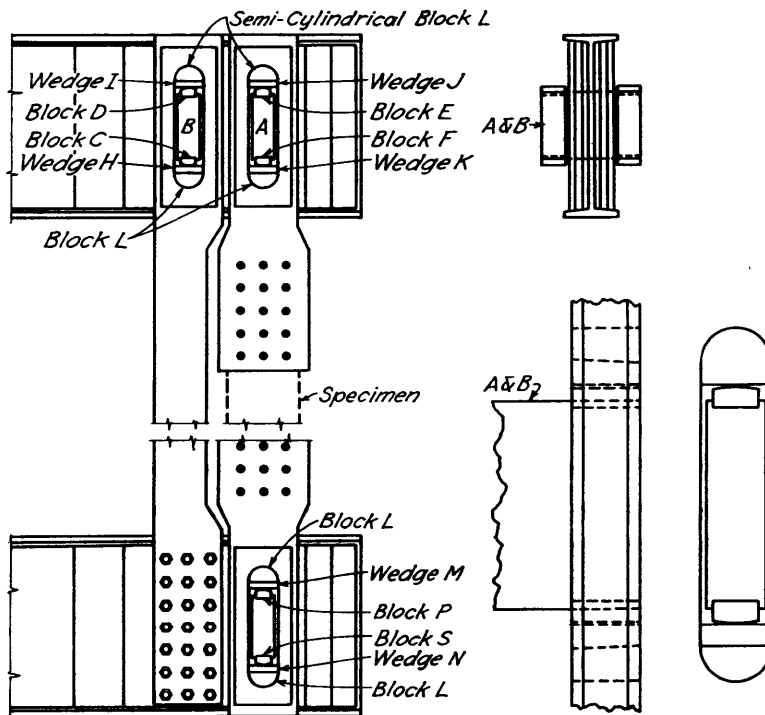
Bearing Supporting I-Beam Lever and at Outer Ends of Pulling Heads of Fatigue Machine
